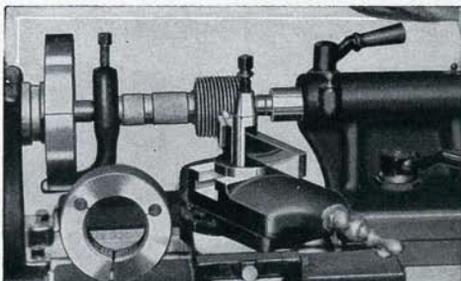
Cutting the Thread on a Master Screw Thread Gauge
